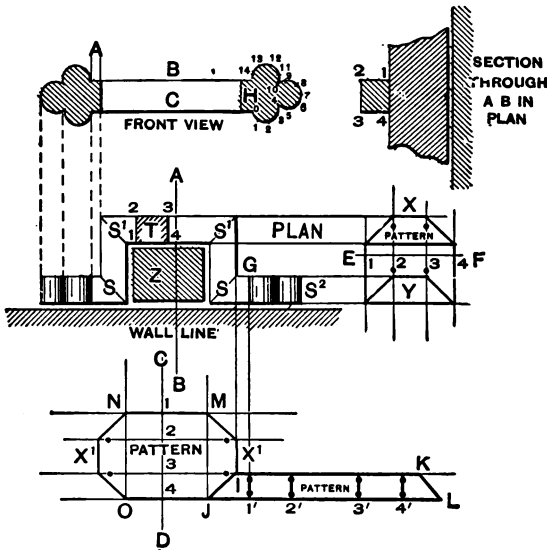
Front, Plan and Sectional Views of Hook Covering ;
